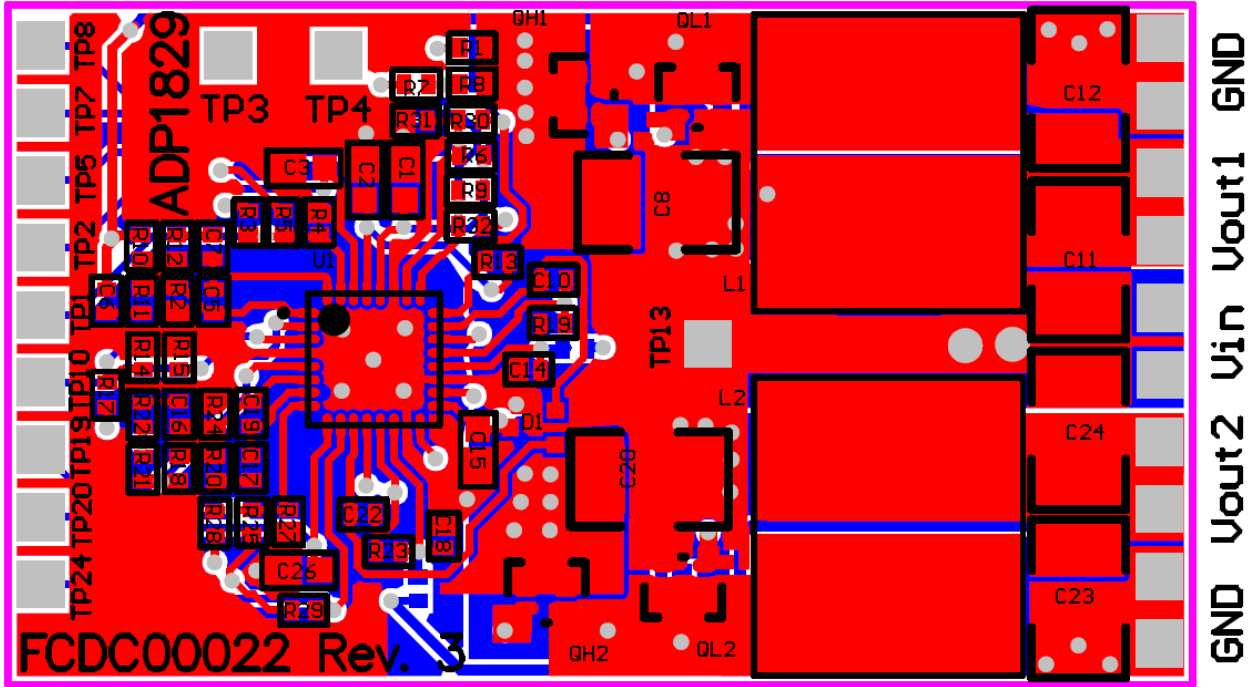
Top Assembly Drawing for 1829 Evaluation Board
